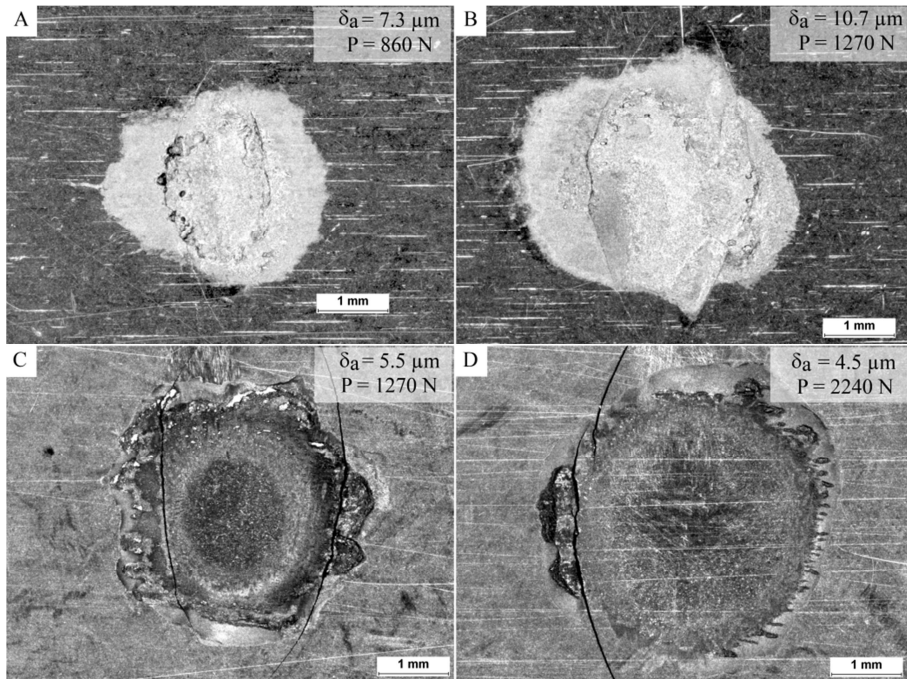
Examples of fretting fatigue cracks with steel-steel (A&B) and bronze-steel (C&D) contacts using the sphere-on-plane apparatus. [Publication II]
